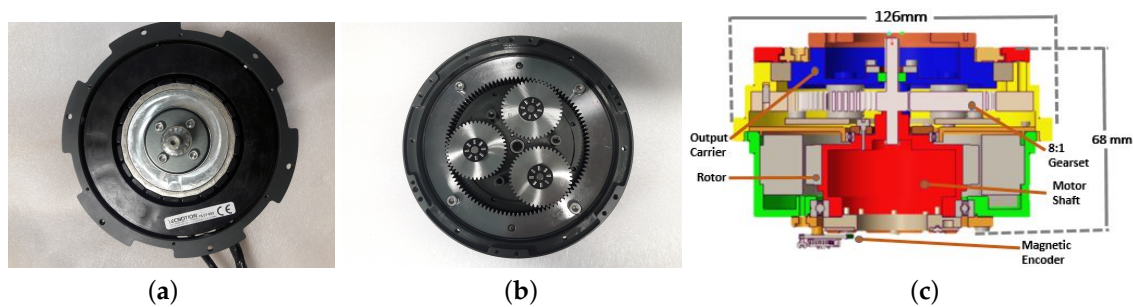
Figures from left: (a) the motor sub-assembly; (b) the gearbox sub-assembly; (c) the cross-sectional view of the actuator assembly in CAD, fitting into dimensions of 126 × 68 mm.
